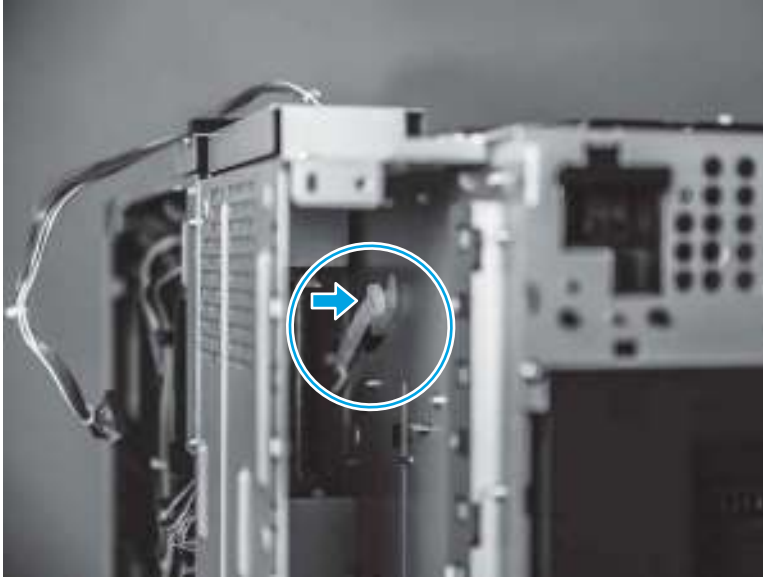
Reinstall the cartridge-lifter assembly (M806; 3 of 6)
